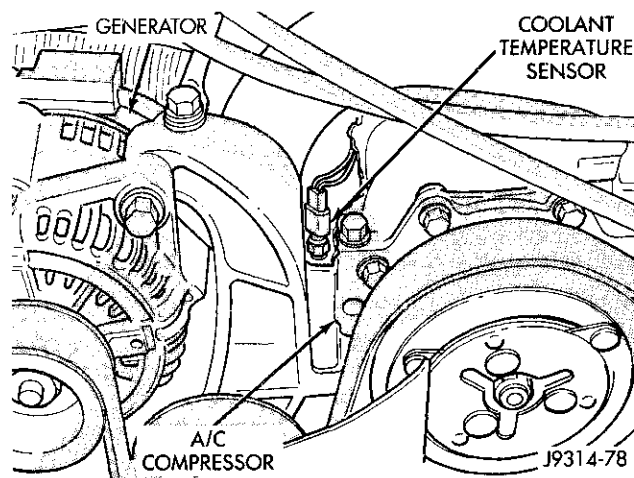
Engine Coolant Temperature Sensor—3.9L/5.2L/5.9L Engines
